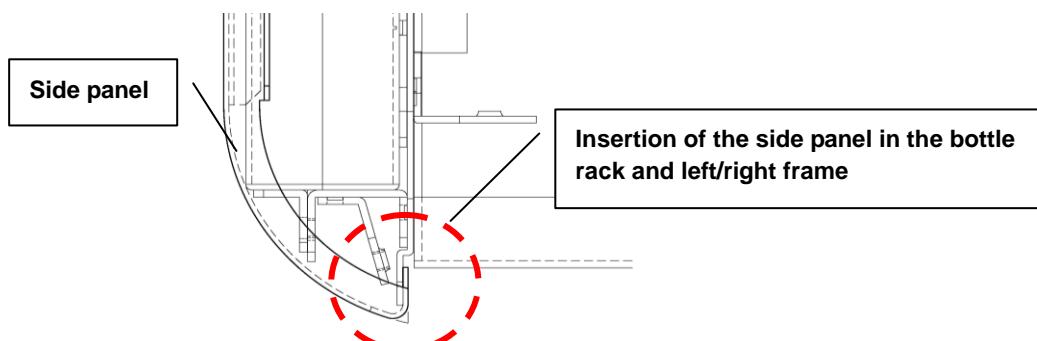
Insertion in bottle rack and side frame
